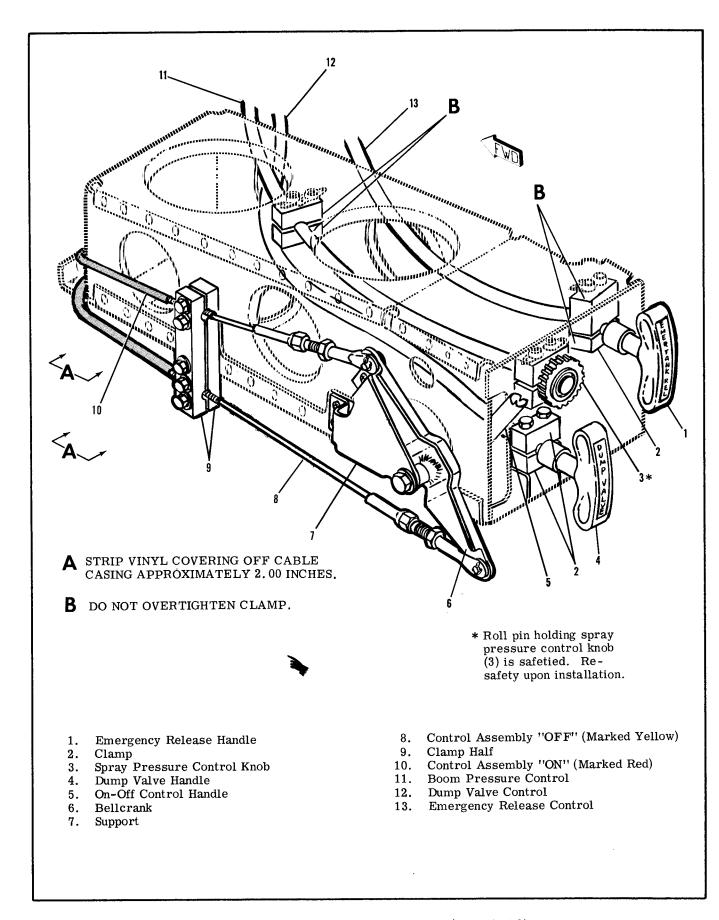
Control Box Installation (Sheet 1 of 2)
